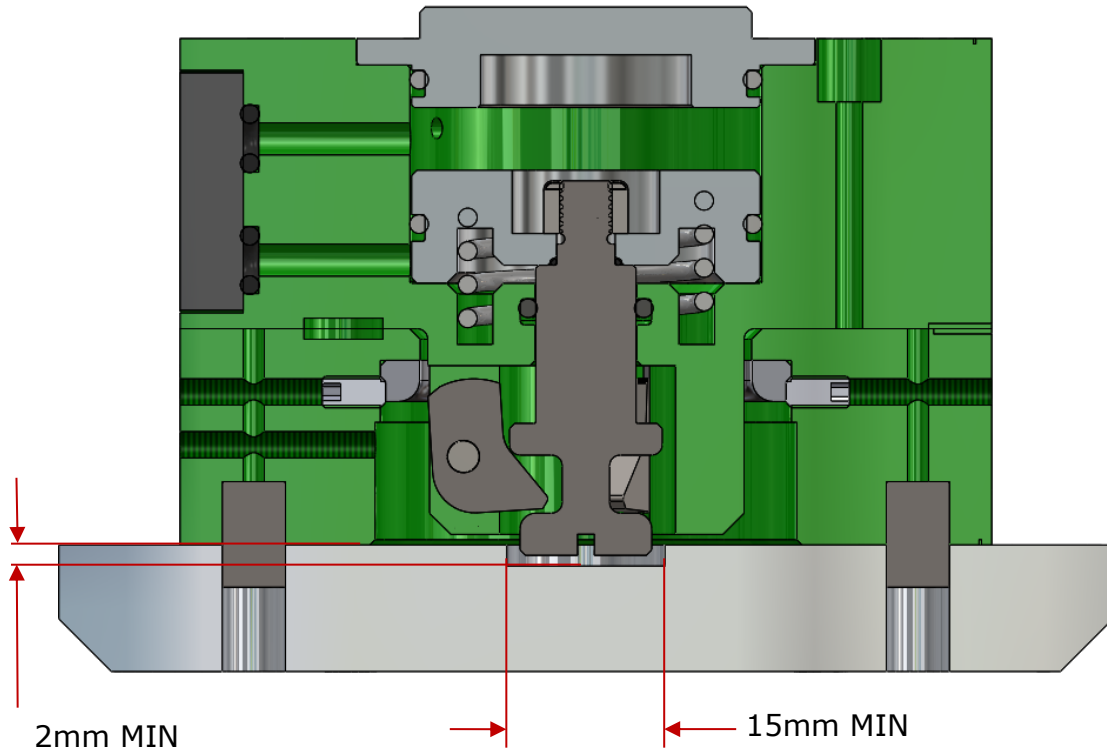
ET63 Tool Side and Tool Plate Installation (No Pilot)
